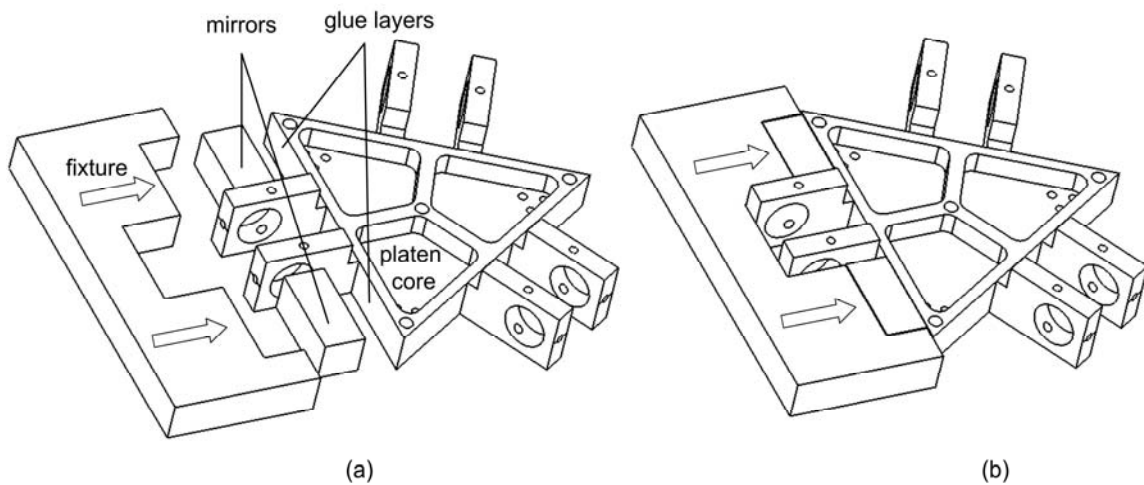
Process for gluing mirrors with platen core (a) before clamping (b) after clamping.
